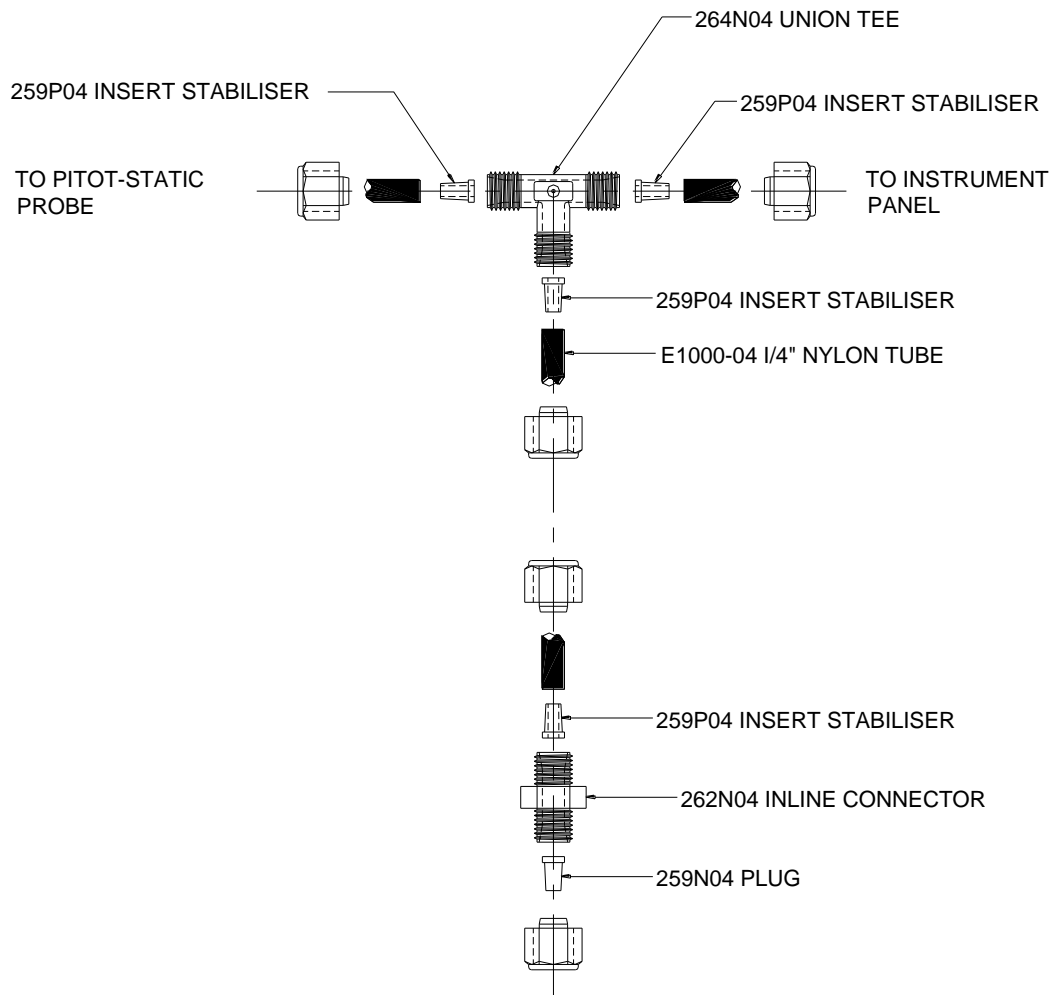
Pitot drain installation (S/N GA8-02-020)
